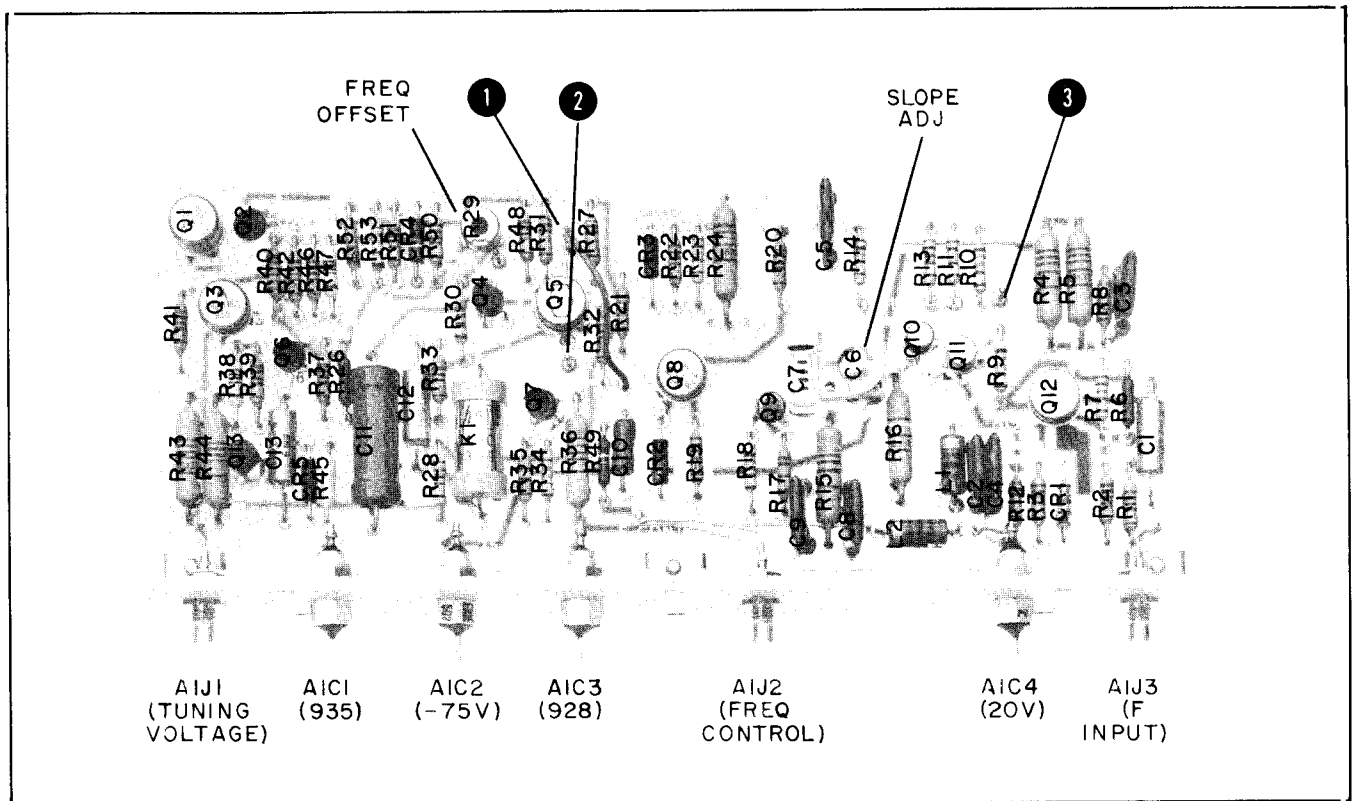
Component Identification A1A1 Discriminator Assembly
